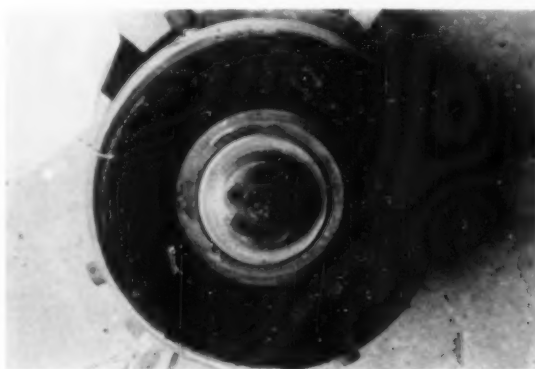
Burner nozzle and primary air baffle plate, showing carbon build-up on baffle plate
